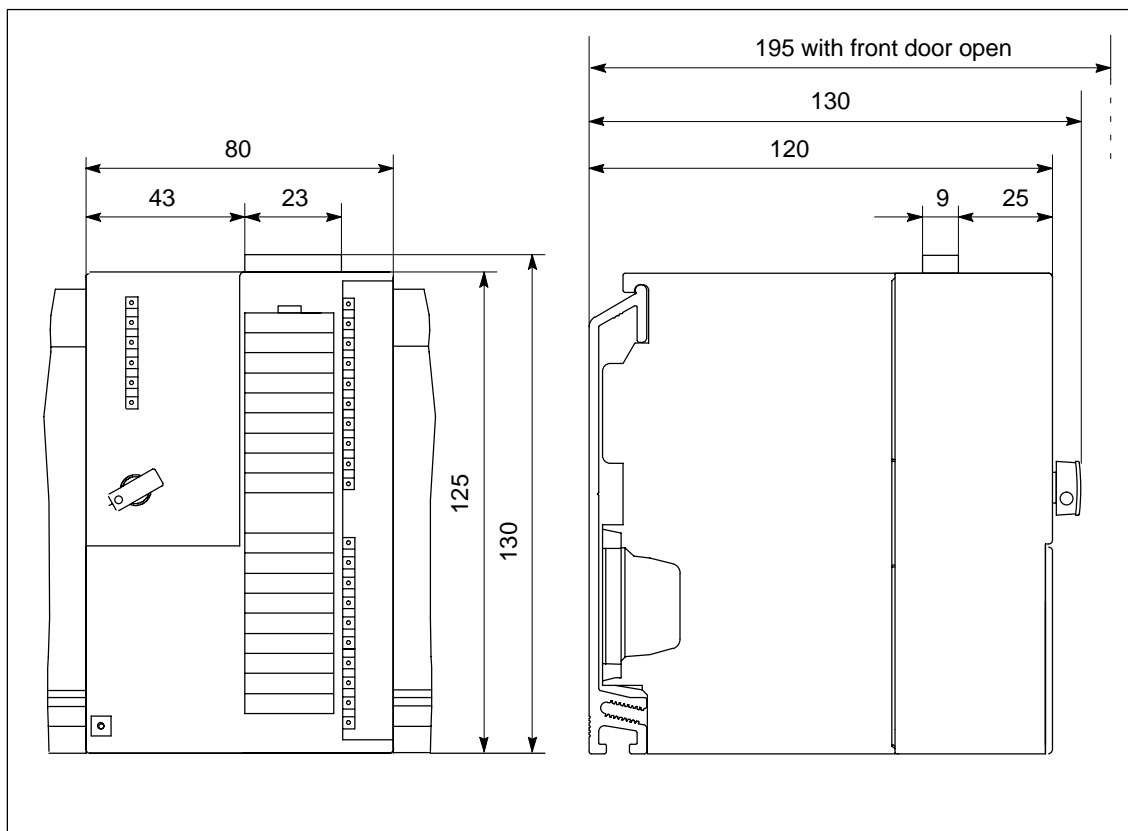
Dimensioned Drawing of the CPU 312 IFM
